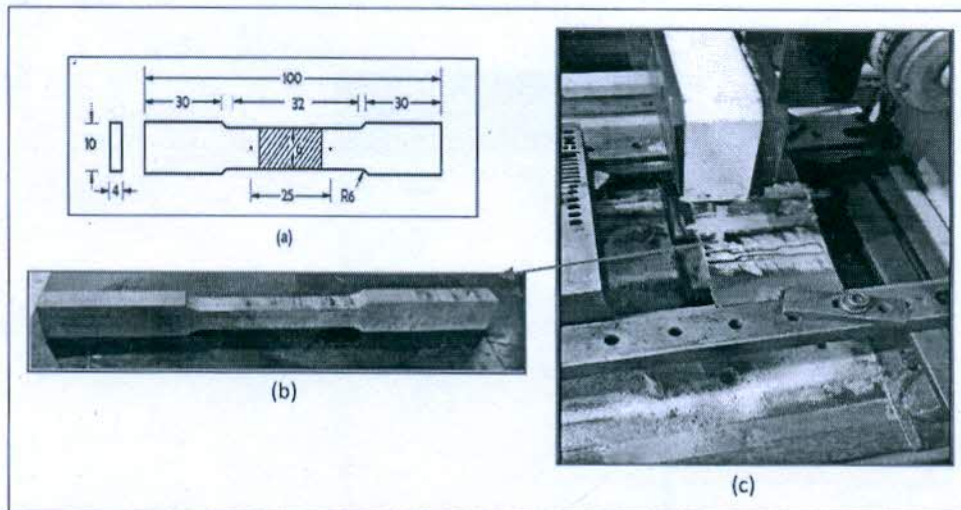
a) tensile specimen sample with detail geometry; b) extracting specimen from stir zone using WEDM; c) actual photograph of the tensile test specimen.
